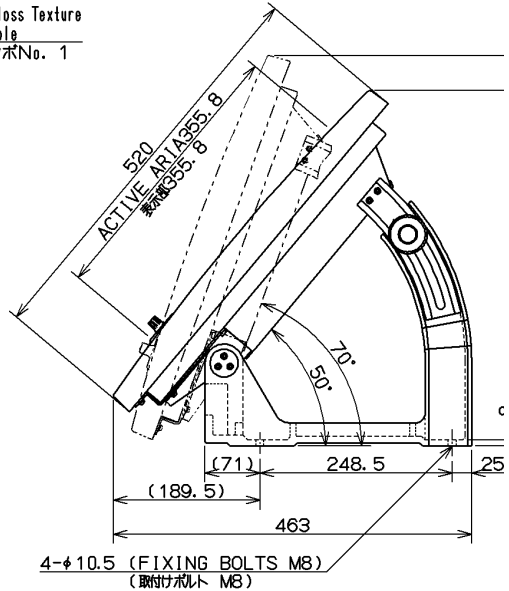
EXTERIOR DRAWING OF DISPLAY UNIT, TYPE NCD-4263 (SELF-STANDING TYPE)
